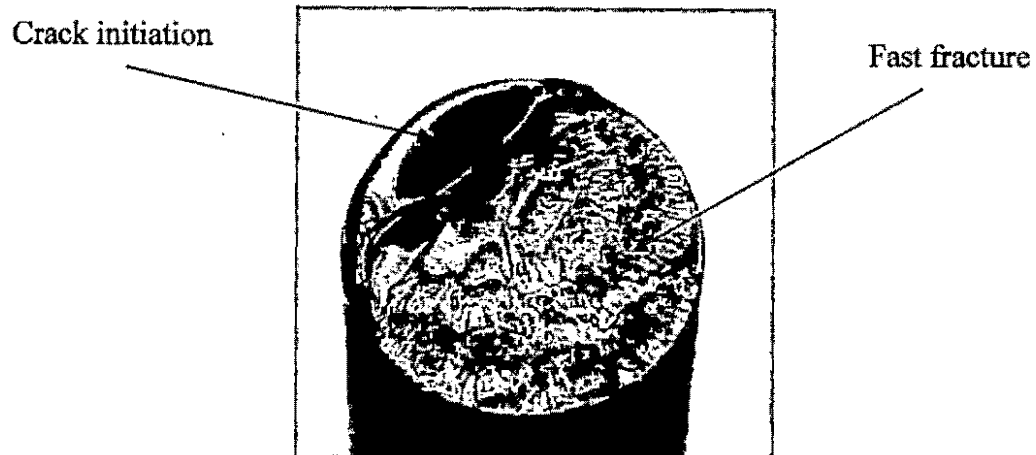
Fracture surface of a smooth tensile specimen tested at 0.5 mm/s.
